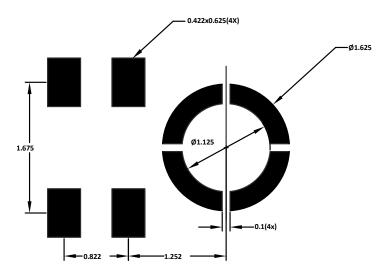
Recommended Solder Paste Stencil Pattern Layout
